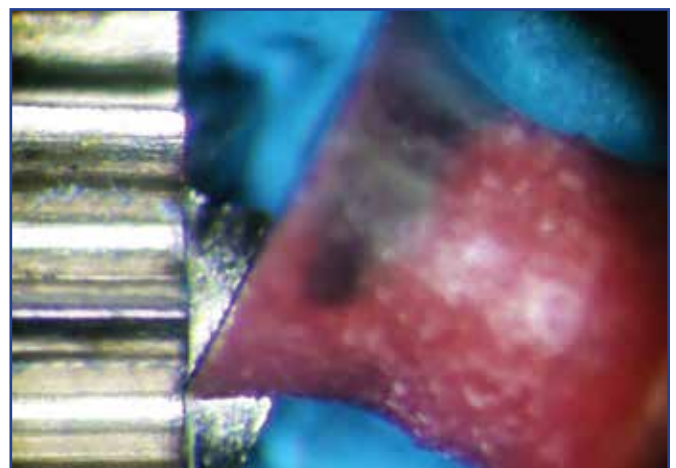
Breguet teeth being shaped by grinding with the degussit stone using the milling or grinding attachment of the lathe on a brass prototype winding pinion (works equally well on steel).
